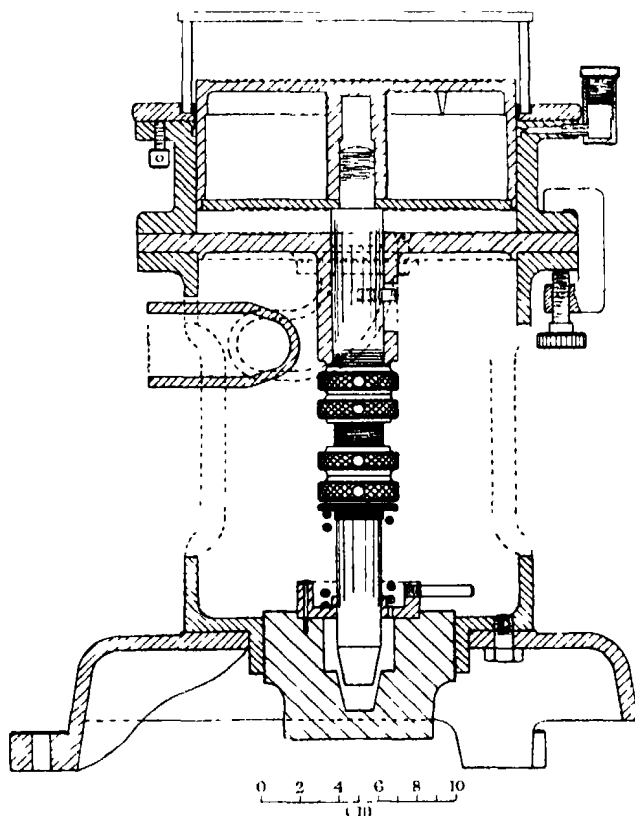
Cloud expansion chamber, Cavendish 1927 type.
